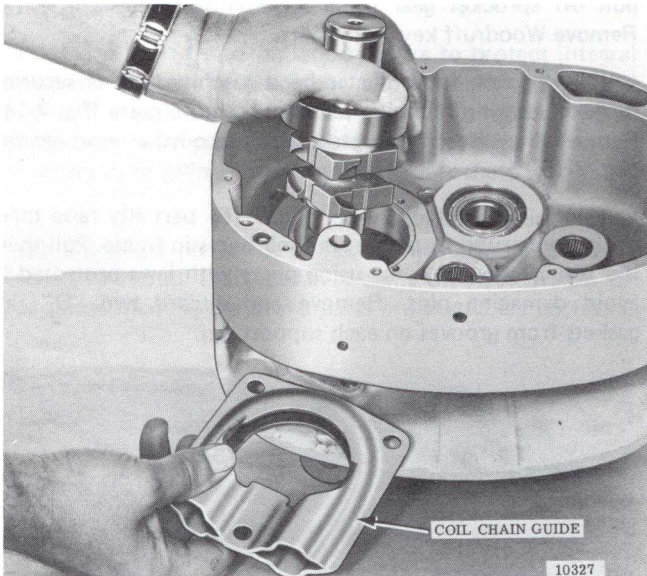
Chain Guide Being Removed From Frame as Sprocket Shaft is Lifted Out (Coil Chain Models)
